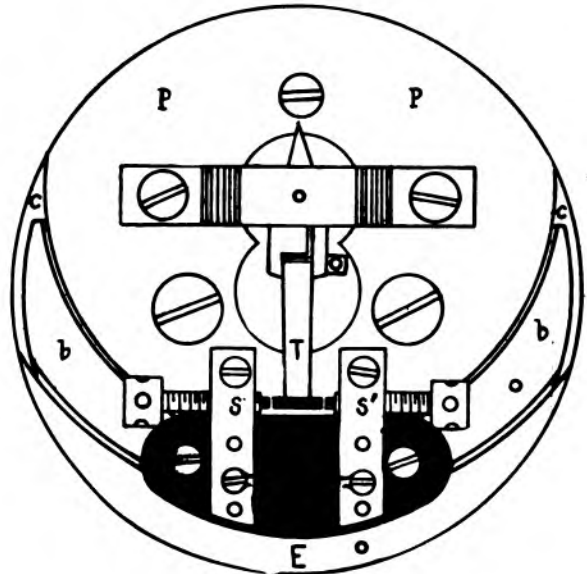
PRINTER RELAY: TOP VIEW OF FIGURE 38.
